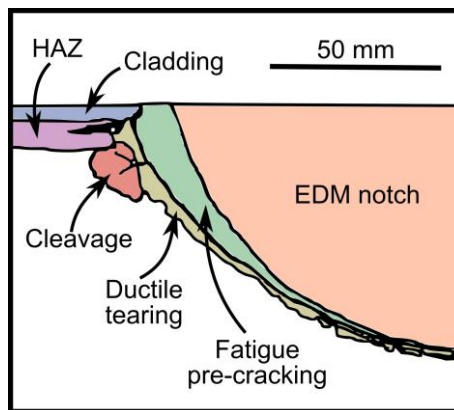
Detailed drawing of one side of Defect R showing the results of post-test fractographic analysis. Adapted from Rintamaa et al. [19].
